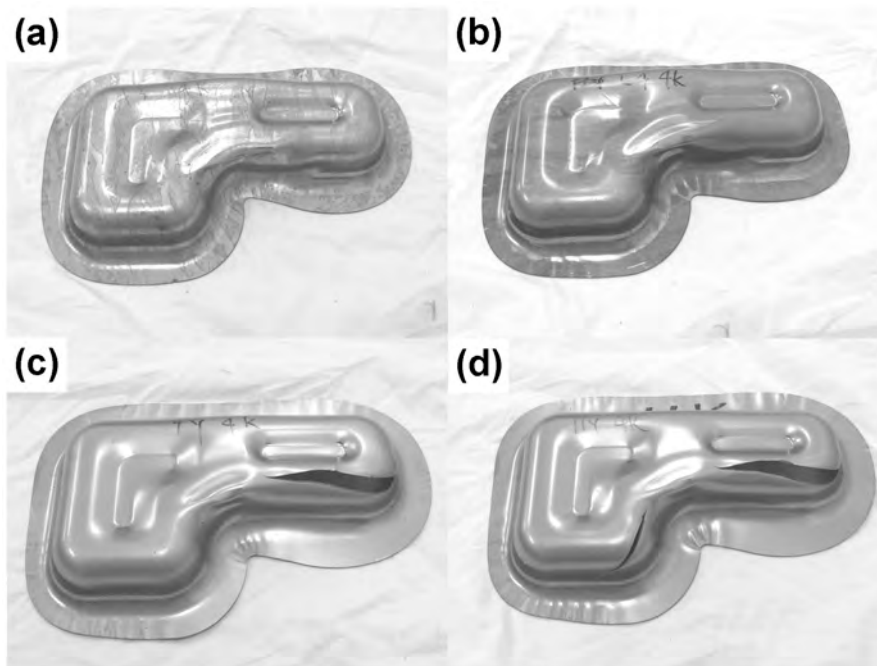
Appearances of the model parts stamped at a blank-holding force of 0.4 MPa. The blank-holding force is represented by the air pressure for holding the blank sheet. (a) UFG-MP3, (b) UFG-MP4, (c) DP980 and (d) 1180 steels. The UFG-MP steels showed no cracks (a, b). The DP980 and 1180 steels showed significant cracks at one or two regions (c, d).
